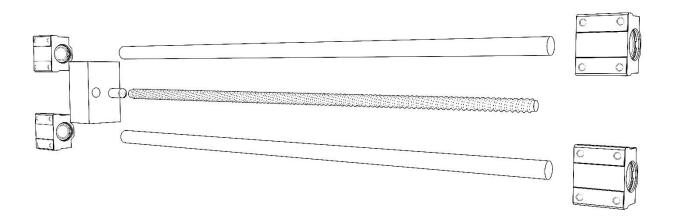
(PUTTING TOGHETER THE PRECISION STEEL RODS, THE THREADED ROD, LINEAR MOTION BALL BEARINGS AND X AXIS MOVEMENT GUIDE)
